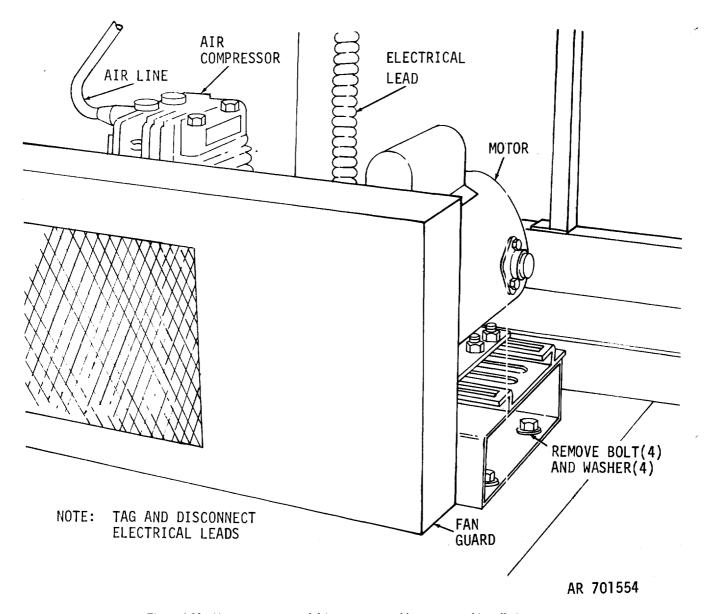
Air commpressor and drive motor assembly, remove and installation
